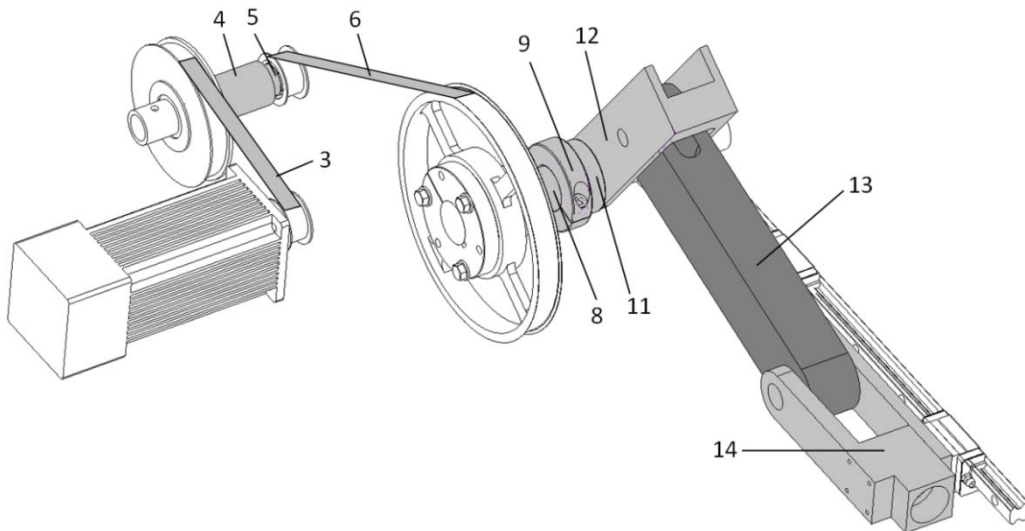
Isometric View of Single-Motor CSTM, all supports hidden. Spring components are shaded grey.
